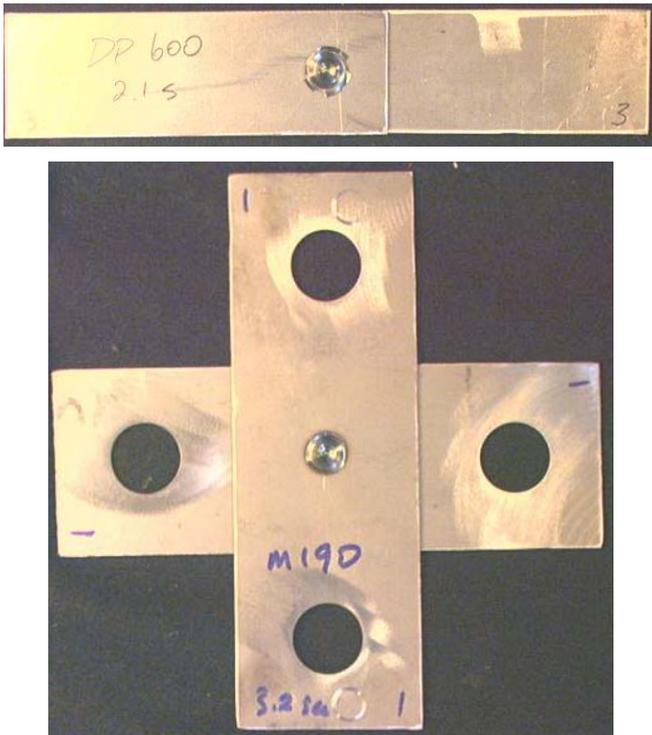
Appearances of the tensile shear and the cross-tension welded coupons. The welds were at the center of the overlapping region.
